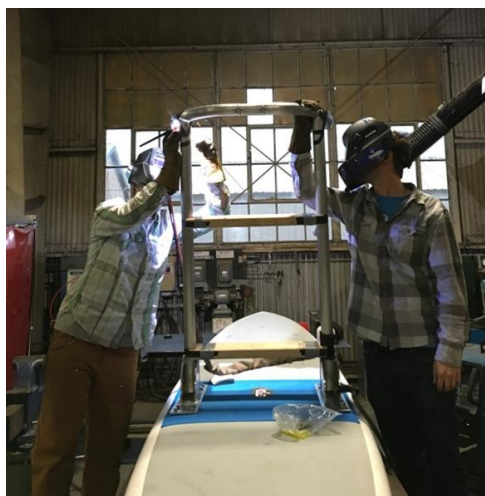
The standing support structure was installed on the board using a wooden jig in order to accurately tack weld the components together.
